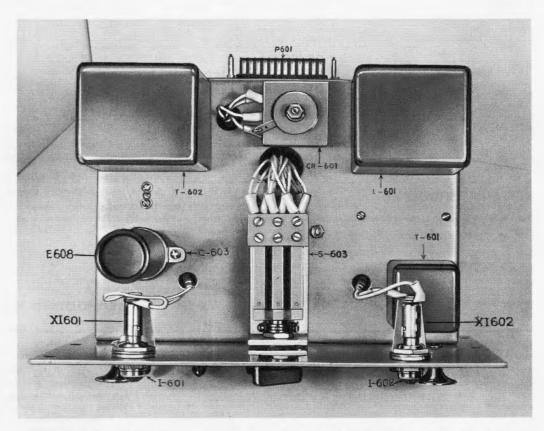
Adapter, Control, Panel and Chassis Assembly, Top View
